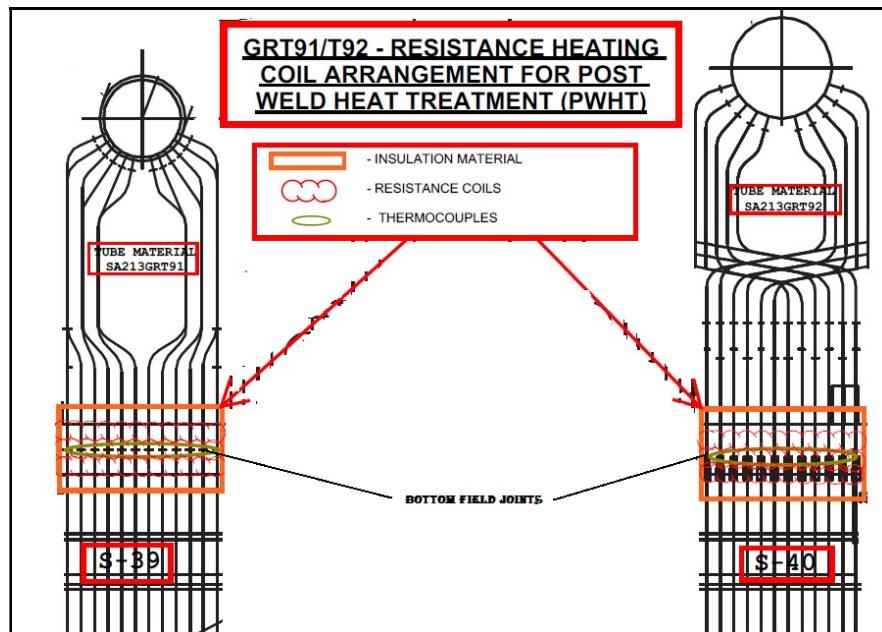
Resistance heating Coil arrangement for PWHT of T91/T92 tube assembly
